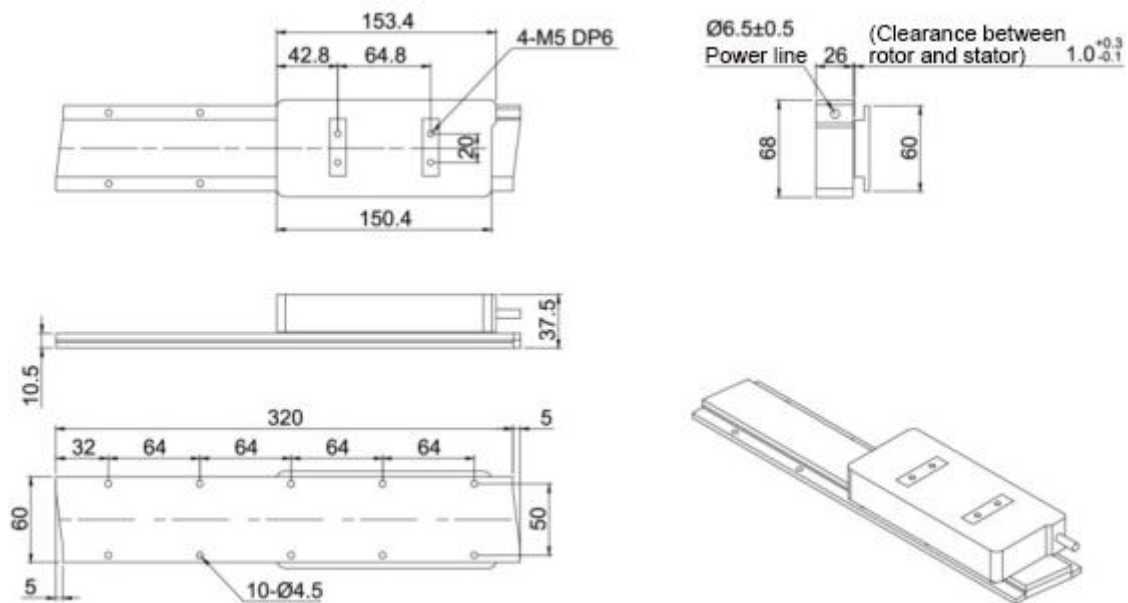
Dimensional drawing of WZCR-AZ45C2-□ motor
